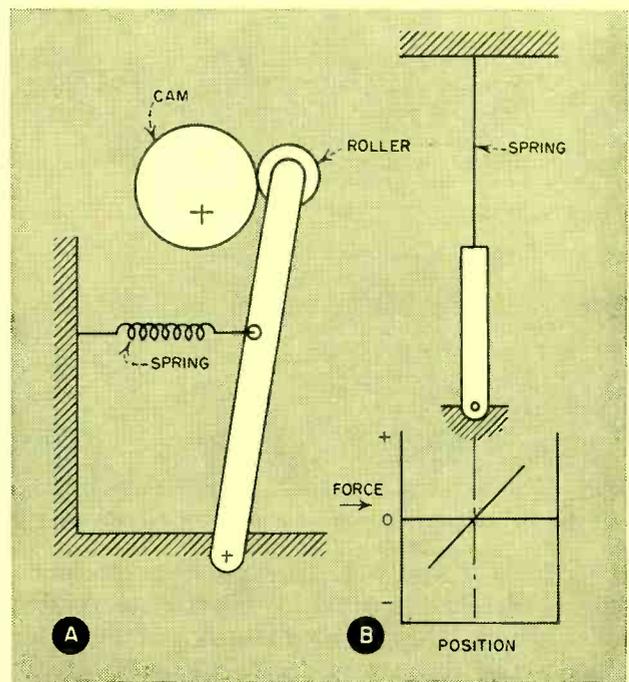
Use of springs in electronic equipment: to keep roller in contact with cam (A) and as a self-centering device (B)
